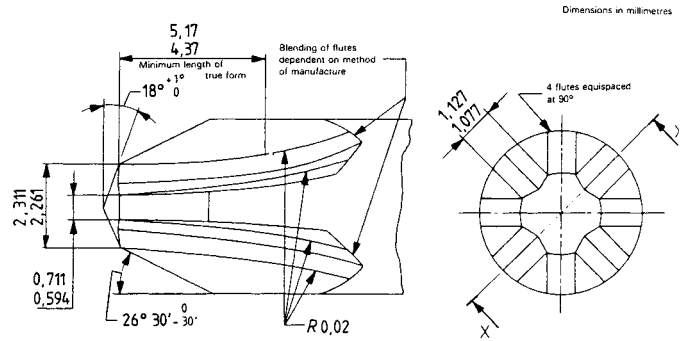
Dimensions and Tolerances of Cross-Slot (Modified Phillips) Screwdriver Bit
